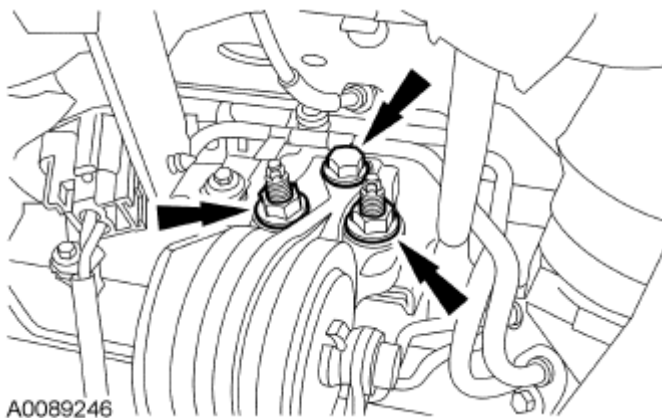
Locating Bolt, Nuts And RH Transaxle Support Insulator
